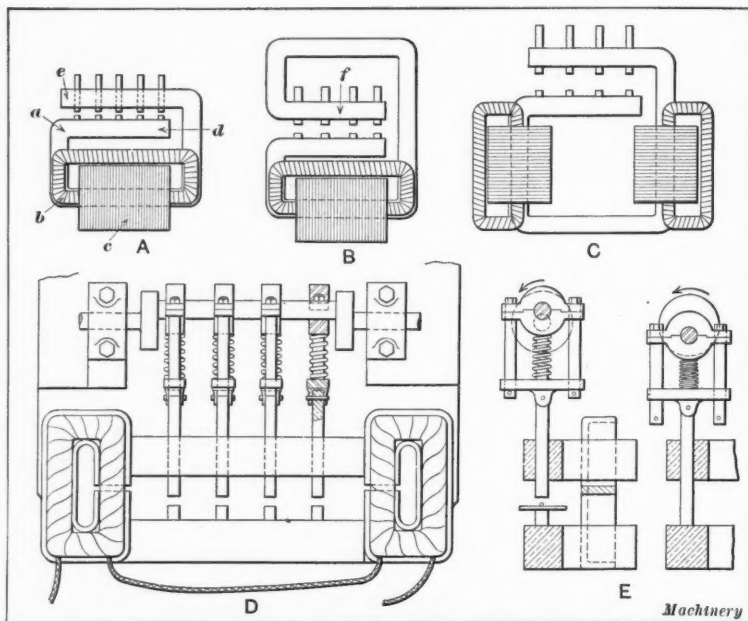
Diagram illustrating Principle of Design of Multiple Electrode Welding Machines
